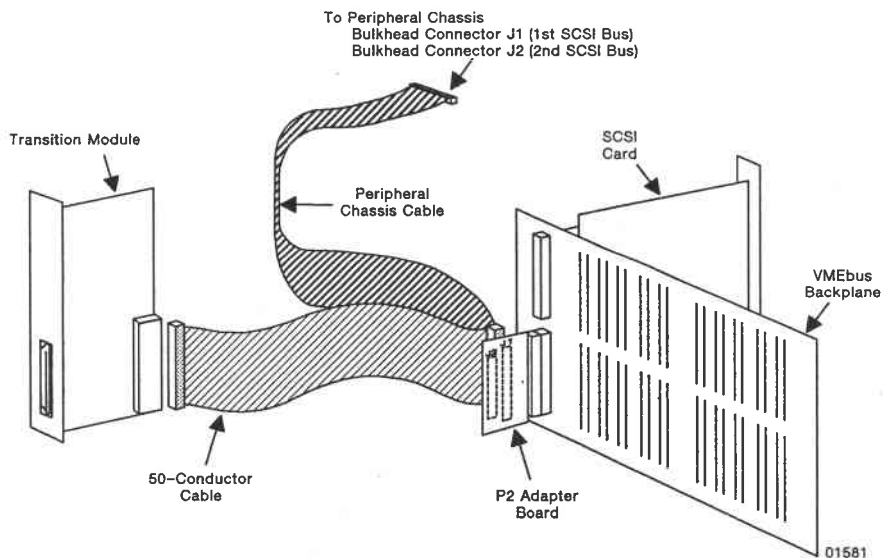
SCSI Bus Adapter Cabling to Peripheral Chassis
